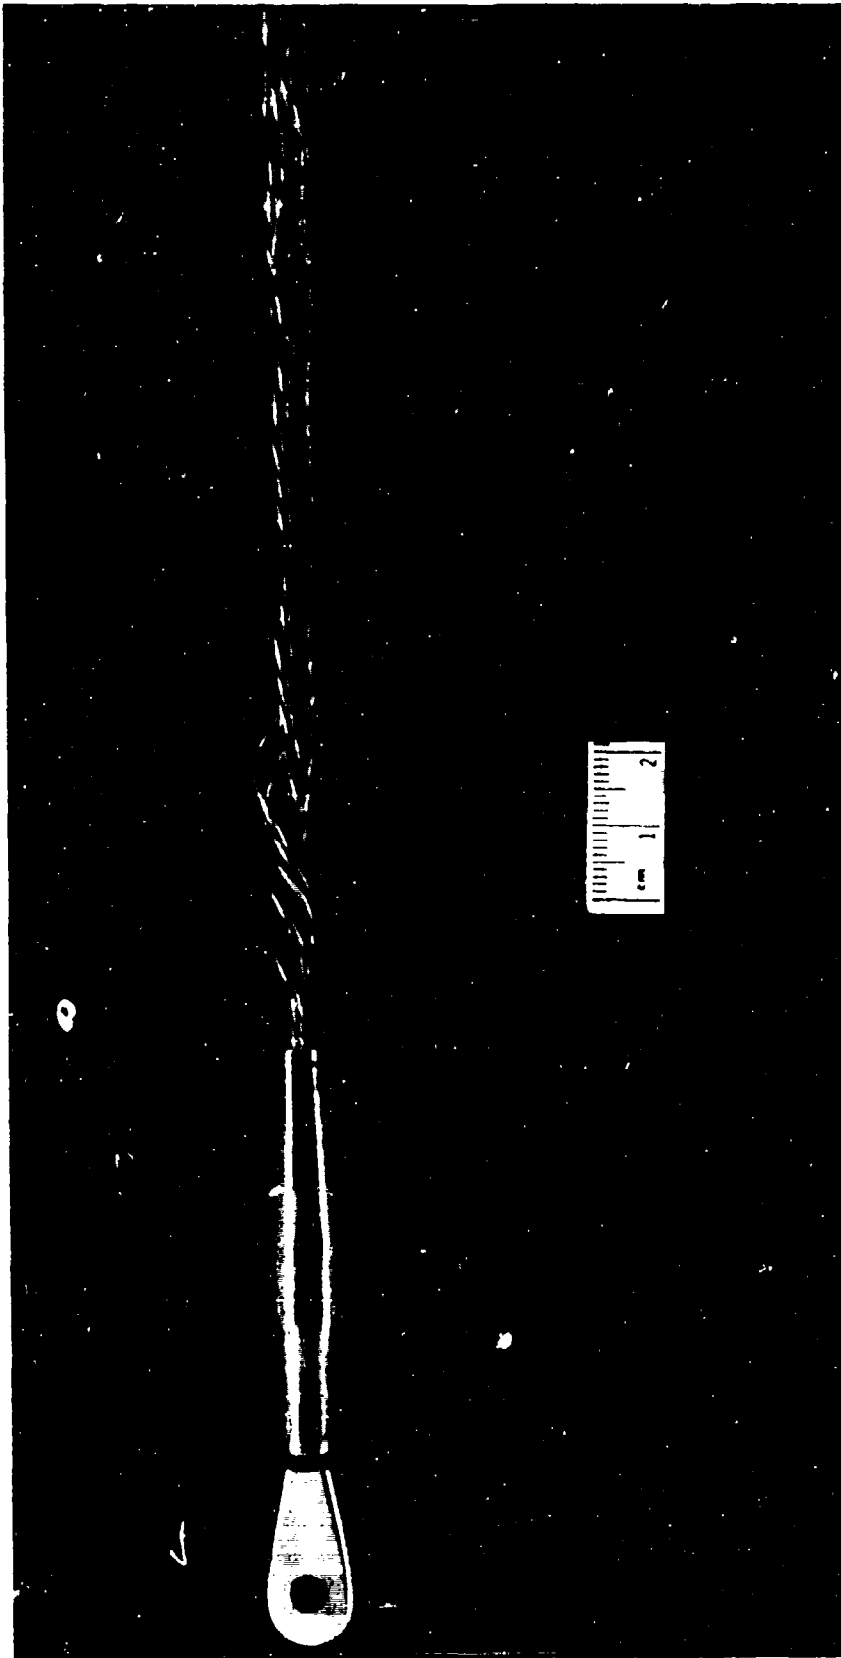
STEEL CABLE SPECIMEN AFTER SUCCESSFUL TENSILE TEST
